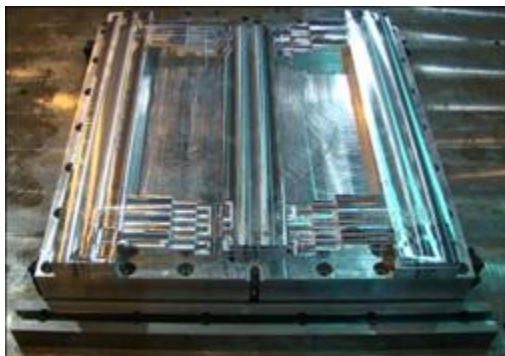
The Completed FSW Bulkhead Preform Ready for Final Machining.
